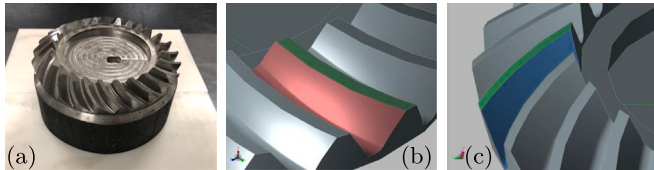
A to-be-inspected workpiece. (a) A manufactured spiral bevel gear. The to-be-inspected surfaces are (b) the top land (green) and right flank (red), and (c) left flank (blue). (For interpretation of the references to color in this figure legend, the reader is referred to the web version of this article.)
